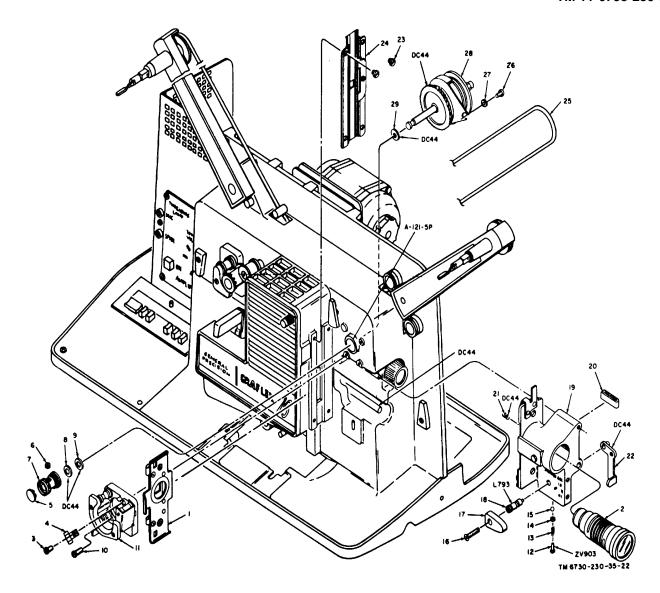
Film feed and film gate mechanism, exploded view. 3-6
